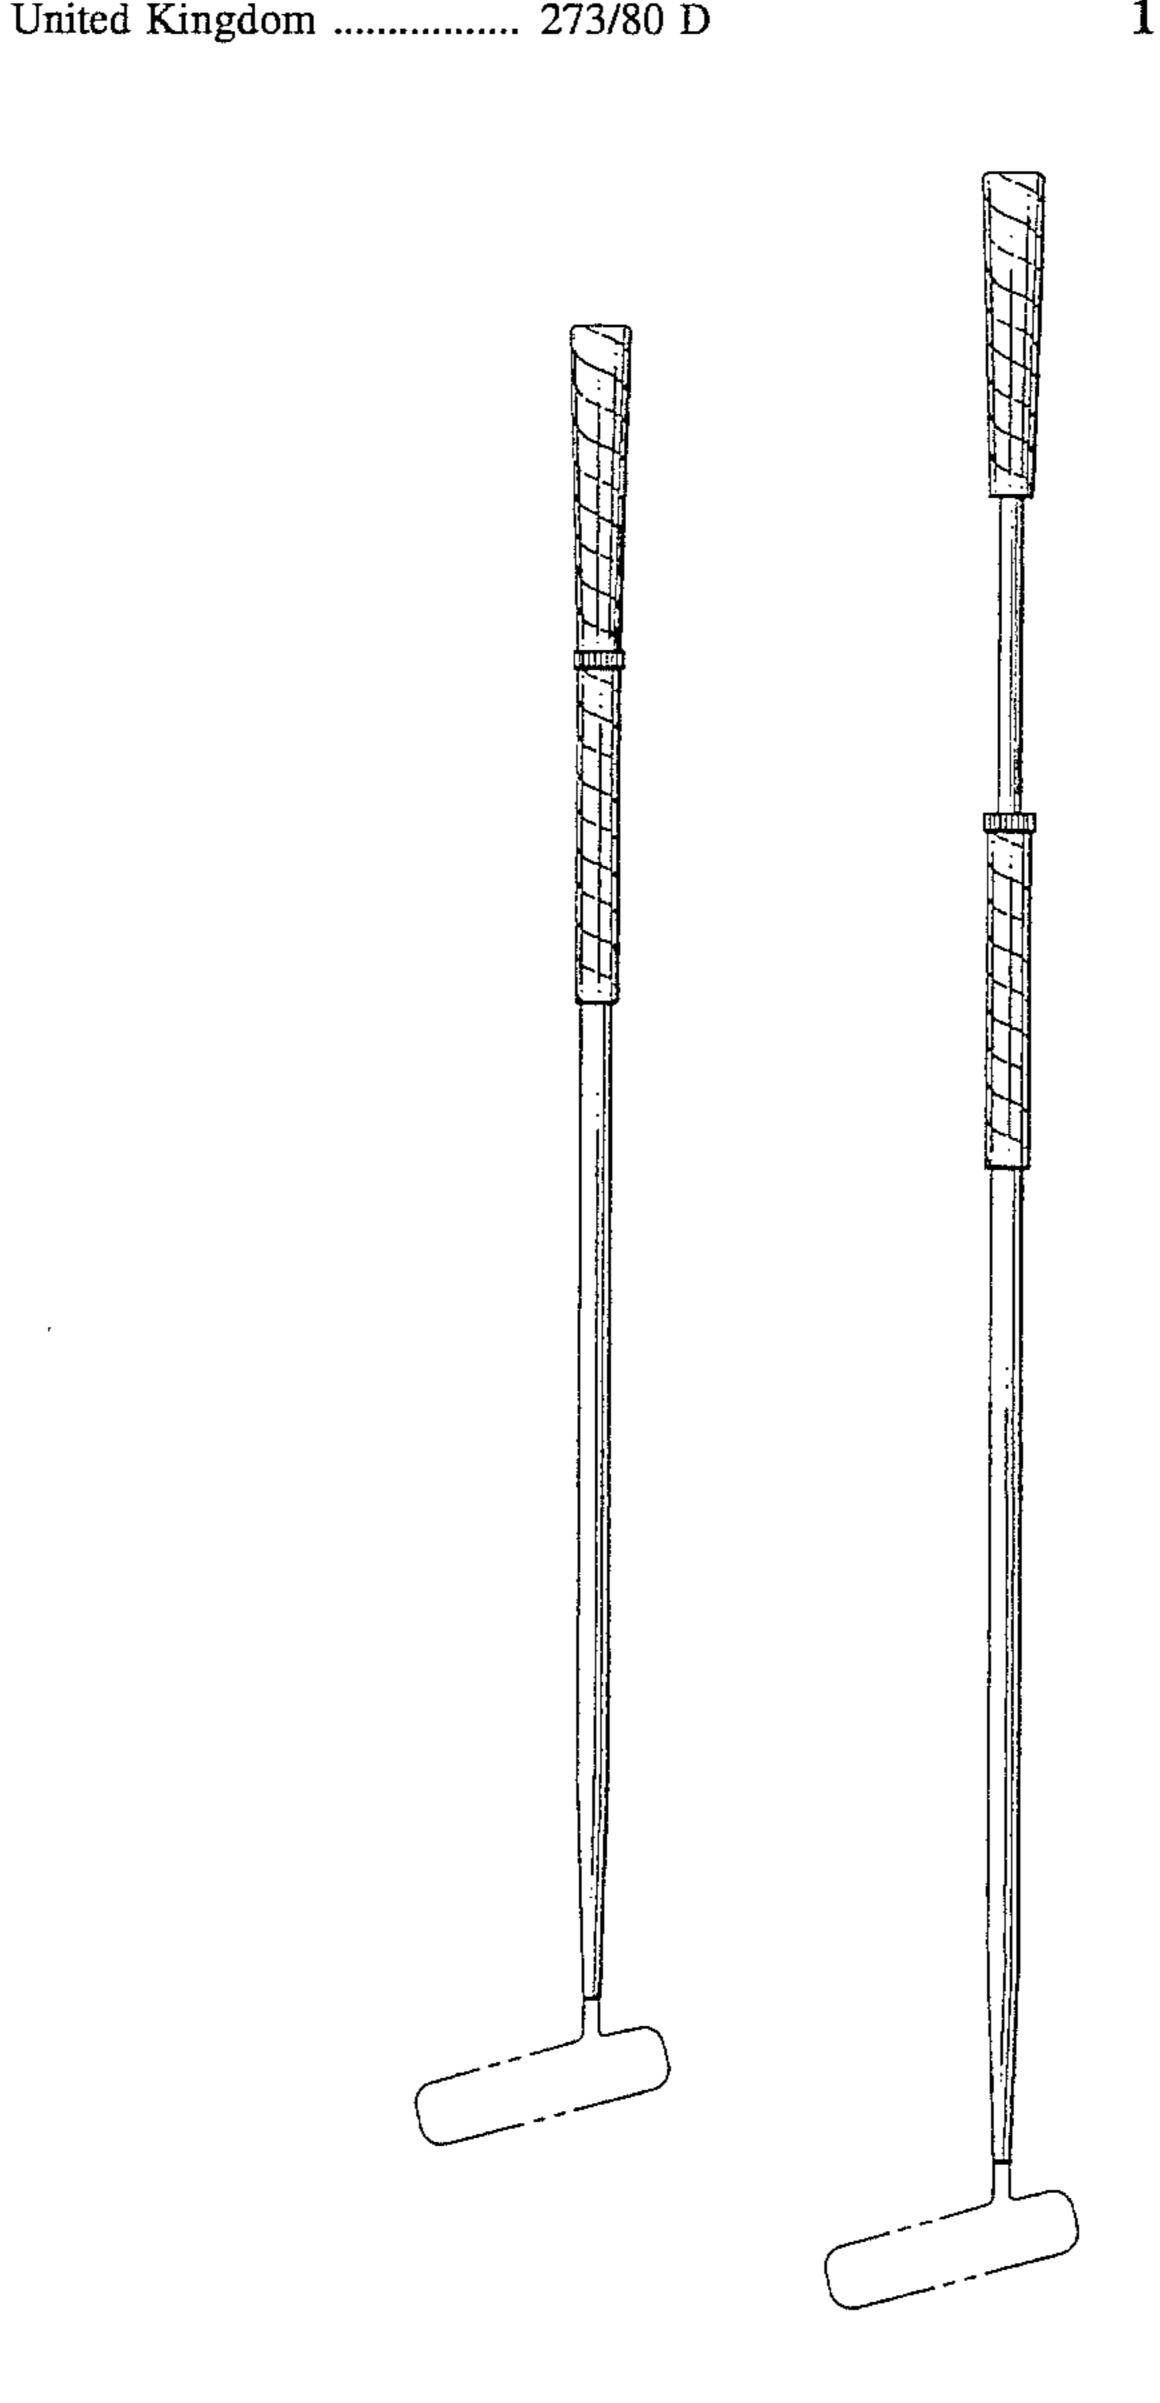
is a front elevational view with the shaft shown in an extended position for clarity of illustration;
